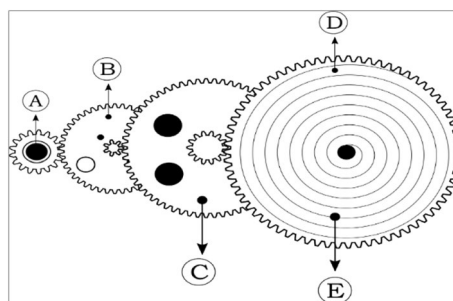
Winding gear train the CITIZEN8200A Caliber. A The oscillating weight or the rotor, B Pawl Winding Wheel, C Reduction Wheel, D Ratchet Wheel, E Mainspring, contained in the barrel (attached to the Ratchet Wheel)
